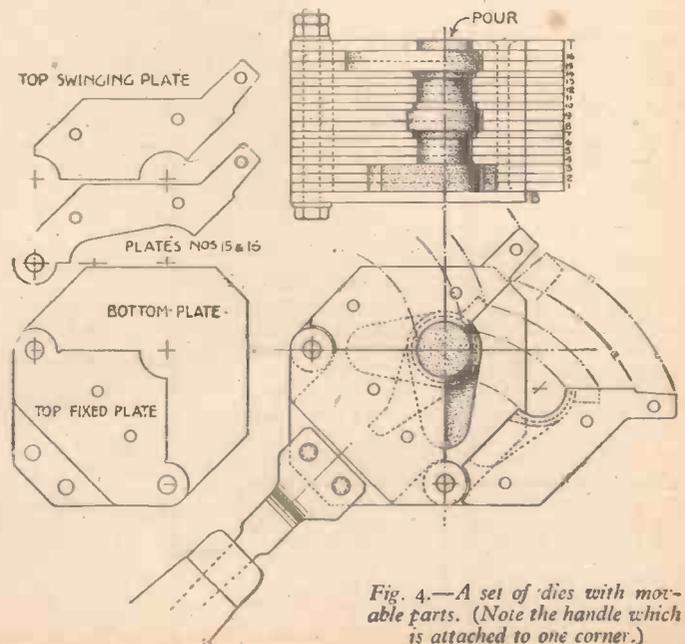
A set of dies with movable parts. (Note the handle which is attached to one corner.)
